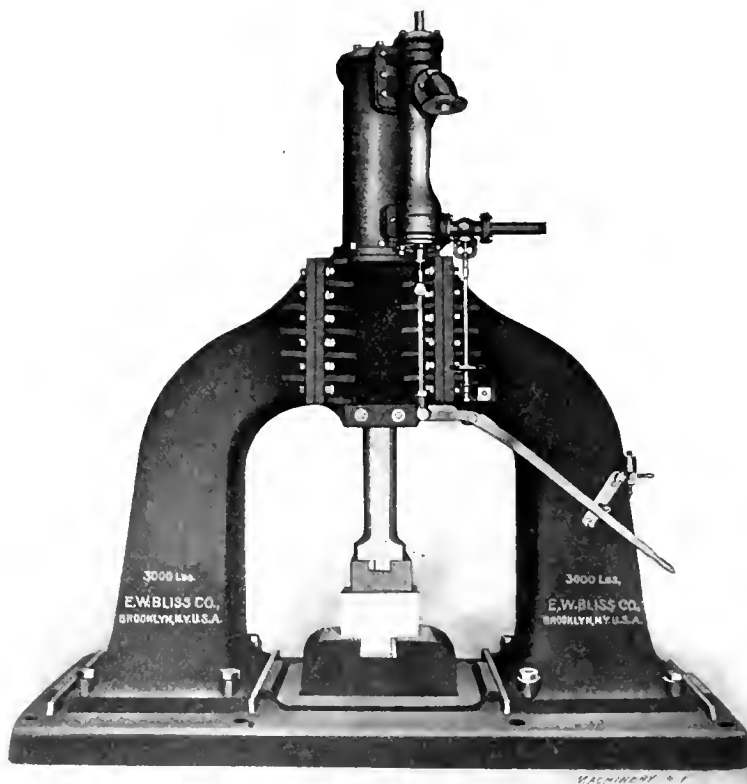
Heavy Double-frame Pneumatic Forging Hammer
